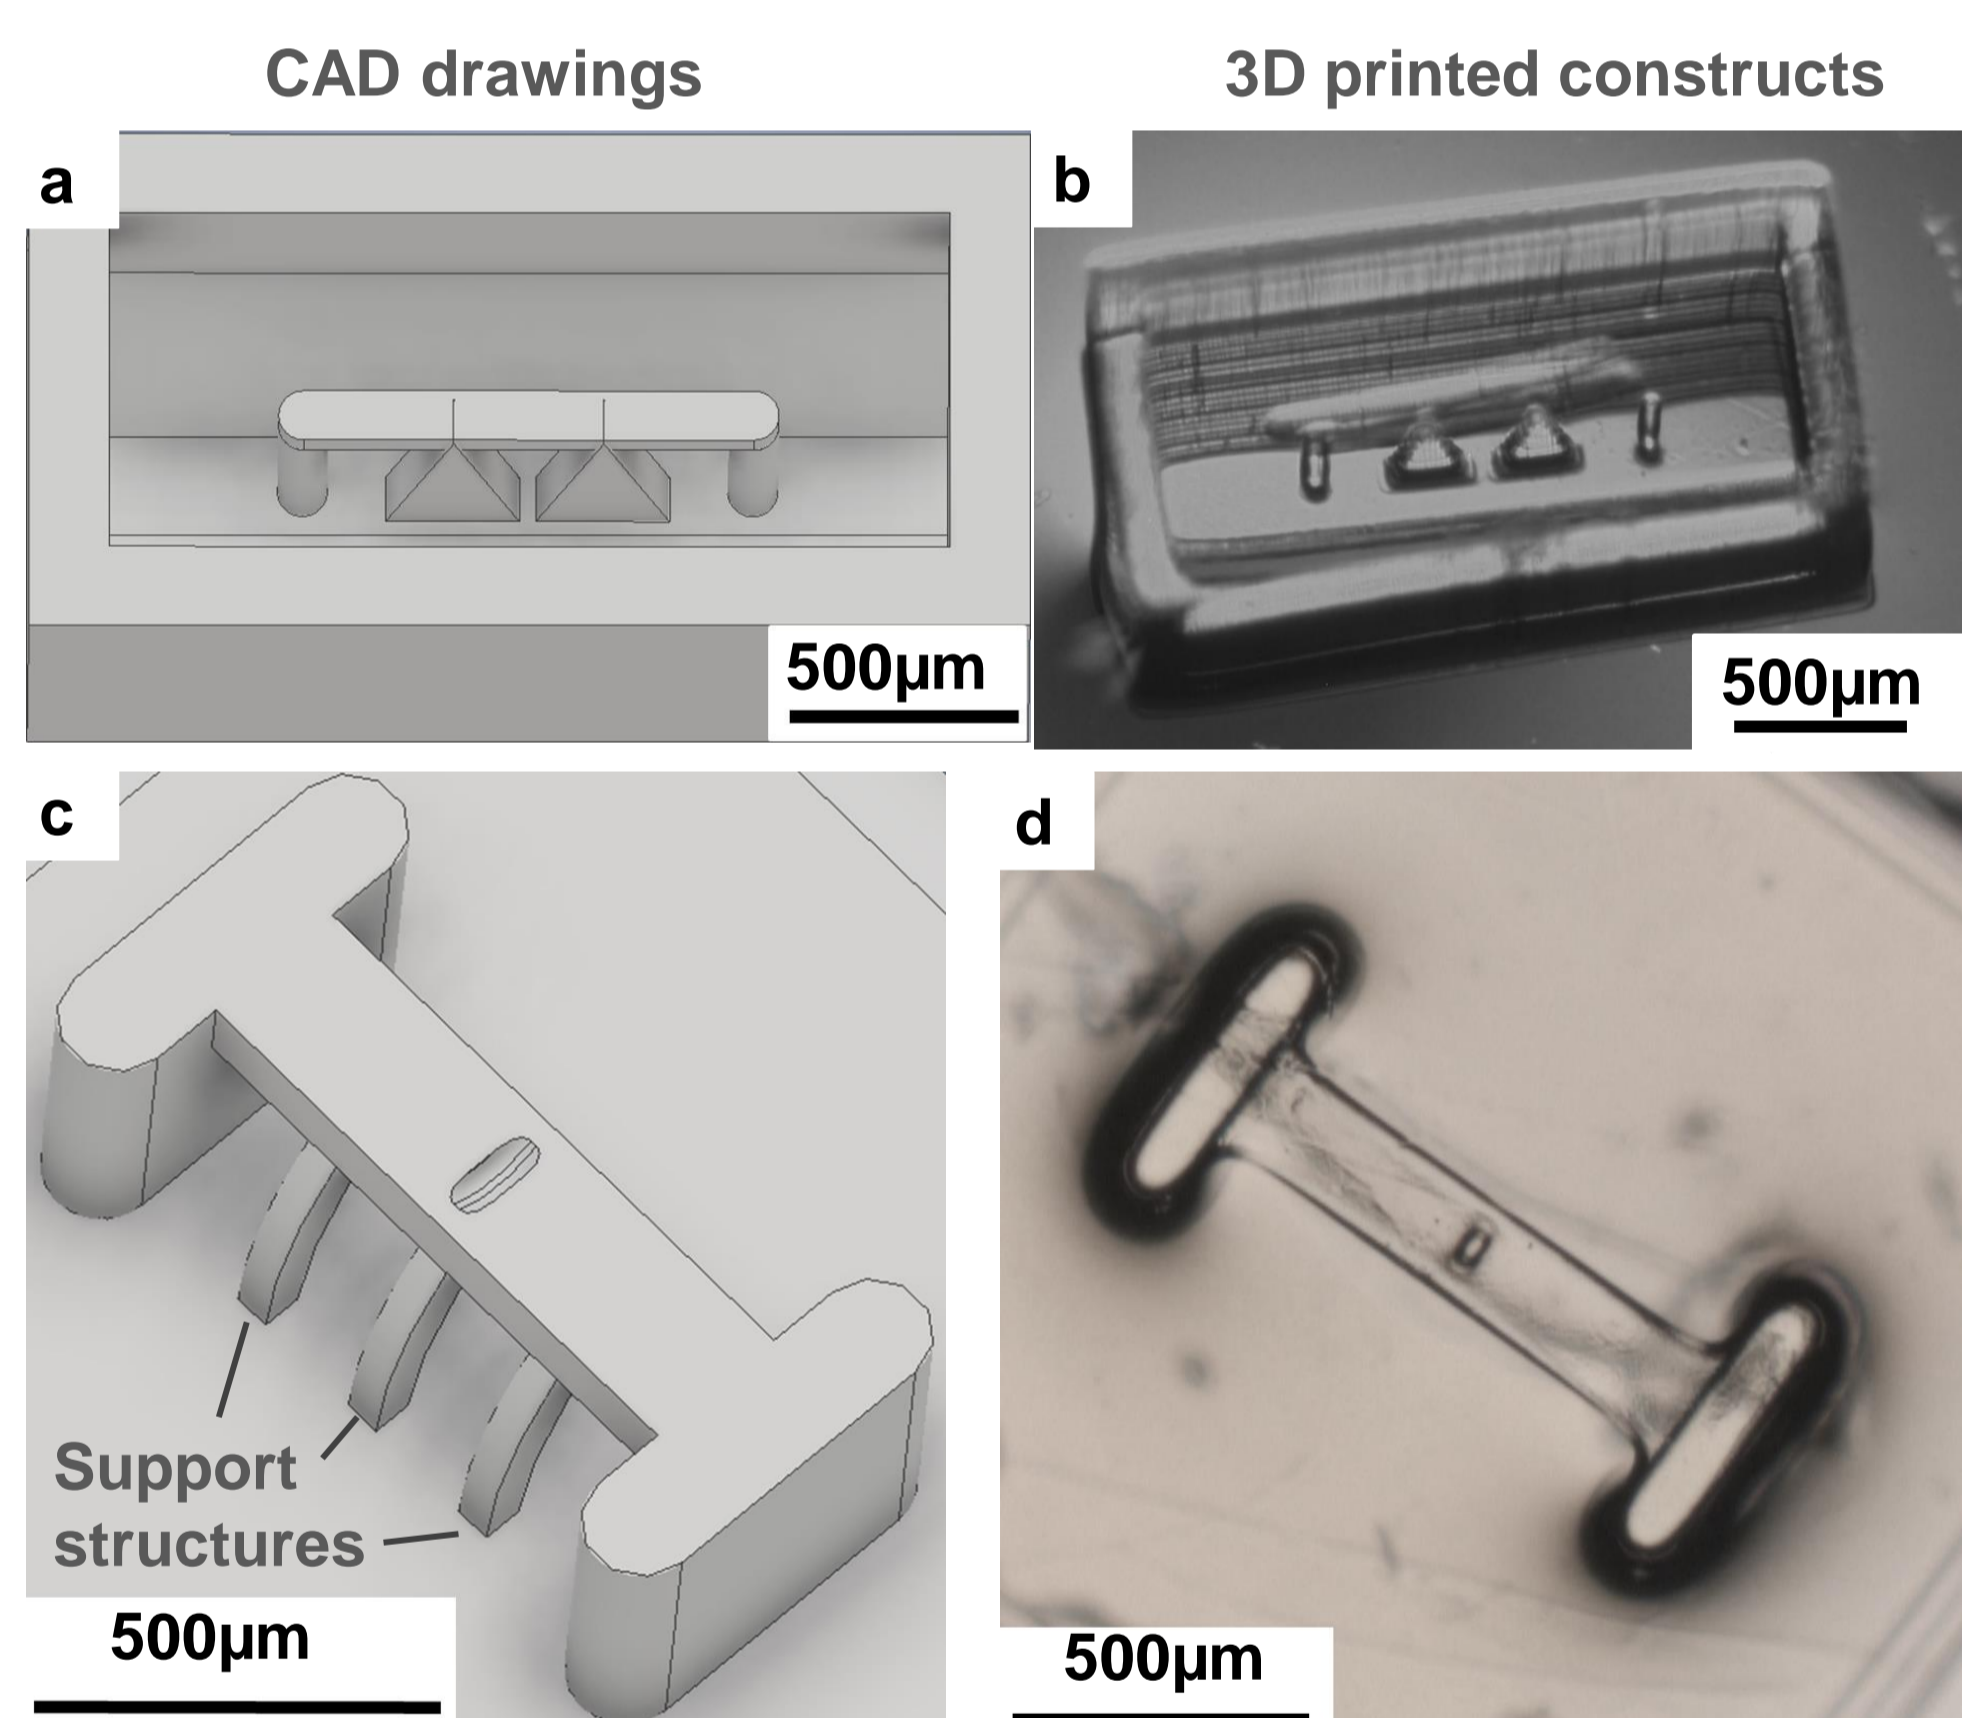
Manufacturing of 3D PEGDA constructs. (a,b) CAD drawing of targeted design showing triangular (a) and arched (b) support structures. (c,d) Resulting 3D printed PEGDA constructs.
